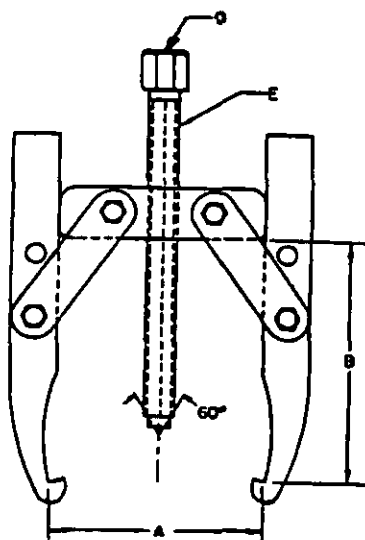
Type I, class 1, style A, puller, mechanical, gear and bearing, two-jaw, external, single end grip. (See Table 1 for size specification.)
